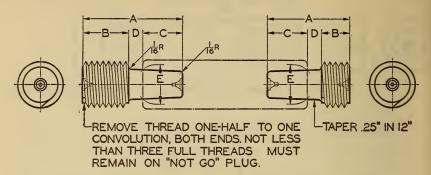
Thread plug gages, 1/4 to 11/2 inches, inclusive (optional to 21/2 inches)
